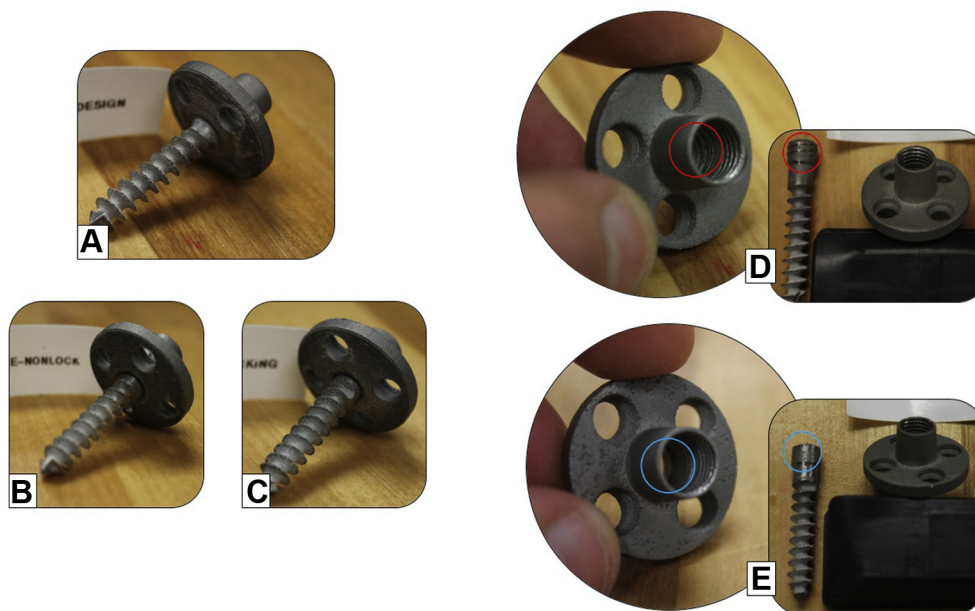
Illustration of 3D direct metal laser sintering baseplate designs: (A) monoblock, (B) 2-piece nonlocking, (C) 2-piece locking. (D) Side-by-side view of the central screw and baseplate design for the 2-piece locking design, where the proximal threaded end of the central screw locks into the internal threads of the baseplate, as highlighted by the red circles. (E) Side-by-side view of the 2-piece nonlocking design, where the blue circles highlight the smooth proximal end of the central screw and no locking threads in the baseplate.
